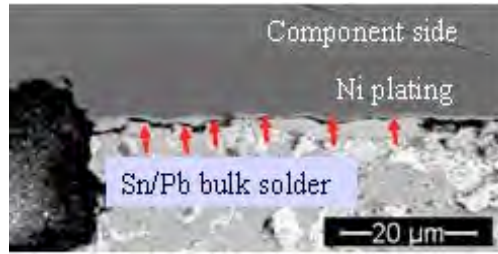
Fracture in the IMC layer on the package side of the interconnect [86].
